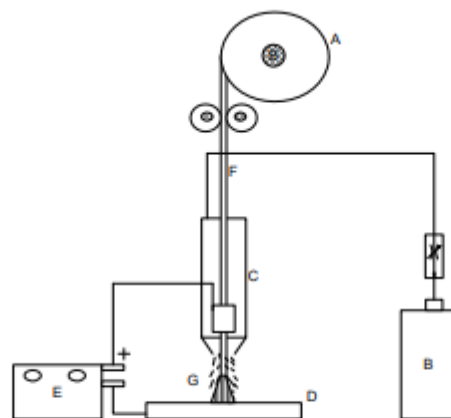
Schematic of GMAW process showing important elements A) Welding spool, B) Shielding gas cylinder, C) welding torch, D) base plate, E) welding power source, and F) consumable electrode.
